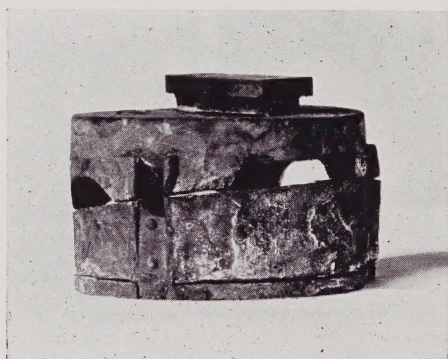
Flask with key-way to fit Taggart-type machine.
